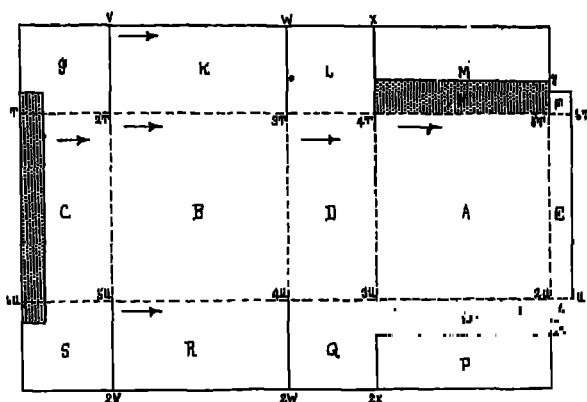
SINGLE-PIECE PACKET FOR SALE OF FLAKED WHOLE WHEAT FOOD.
